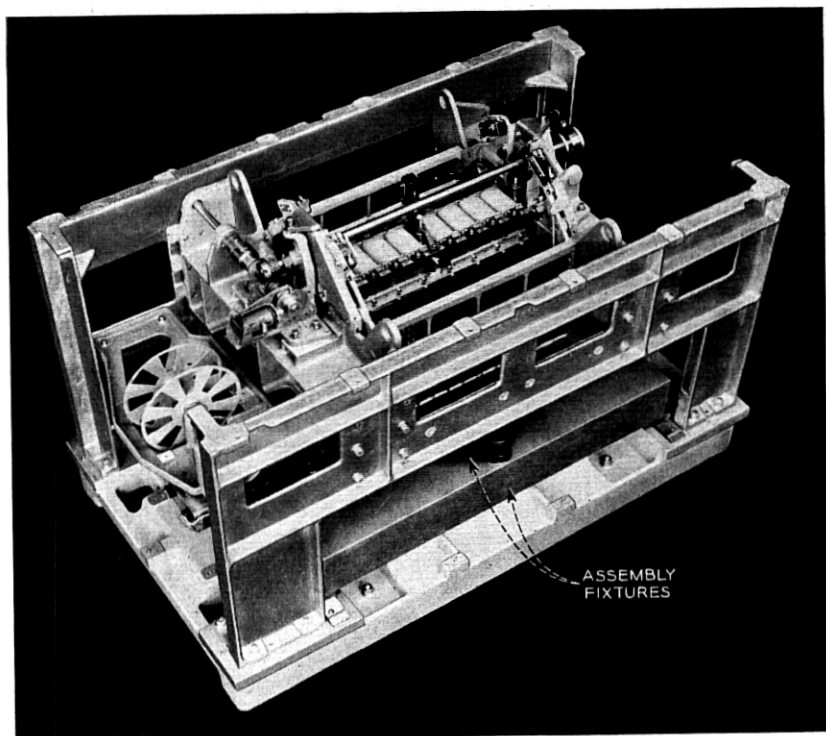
Base and plug assembly fixture, card cage and frames.
